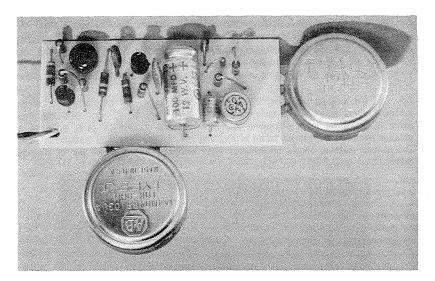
A-Top view of conversion kit P.C. Board with all components in place; this photo matches Fig. 3.
